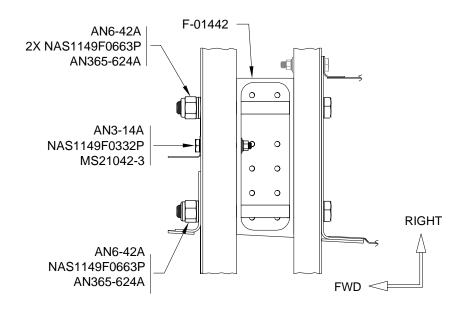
LOWER DRAG FITTING INSTALLATION TAIL DRAGGER HARDWARE SHOWN
